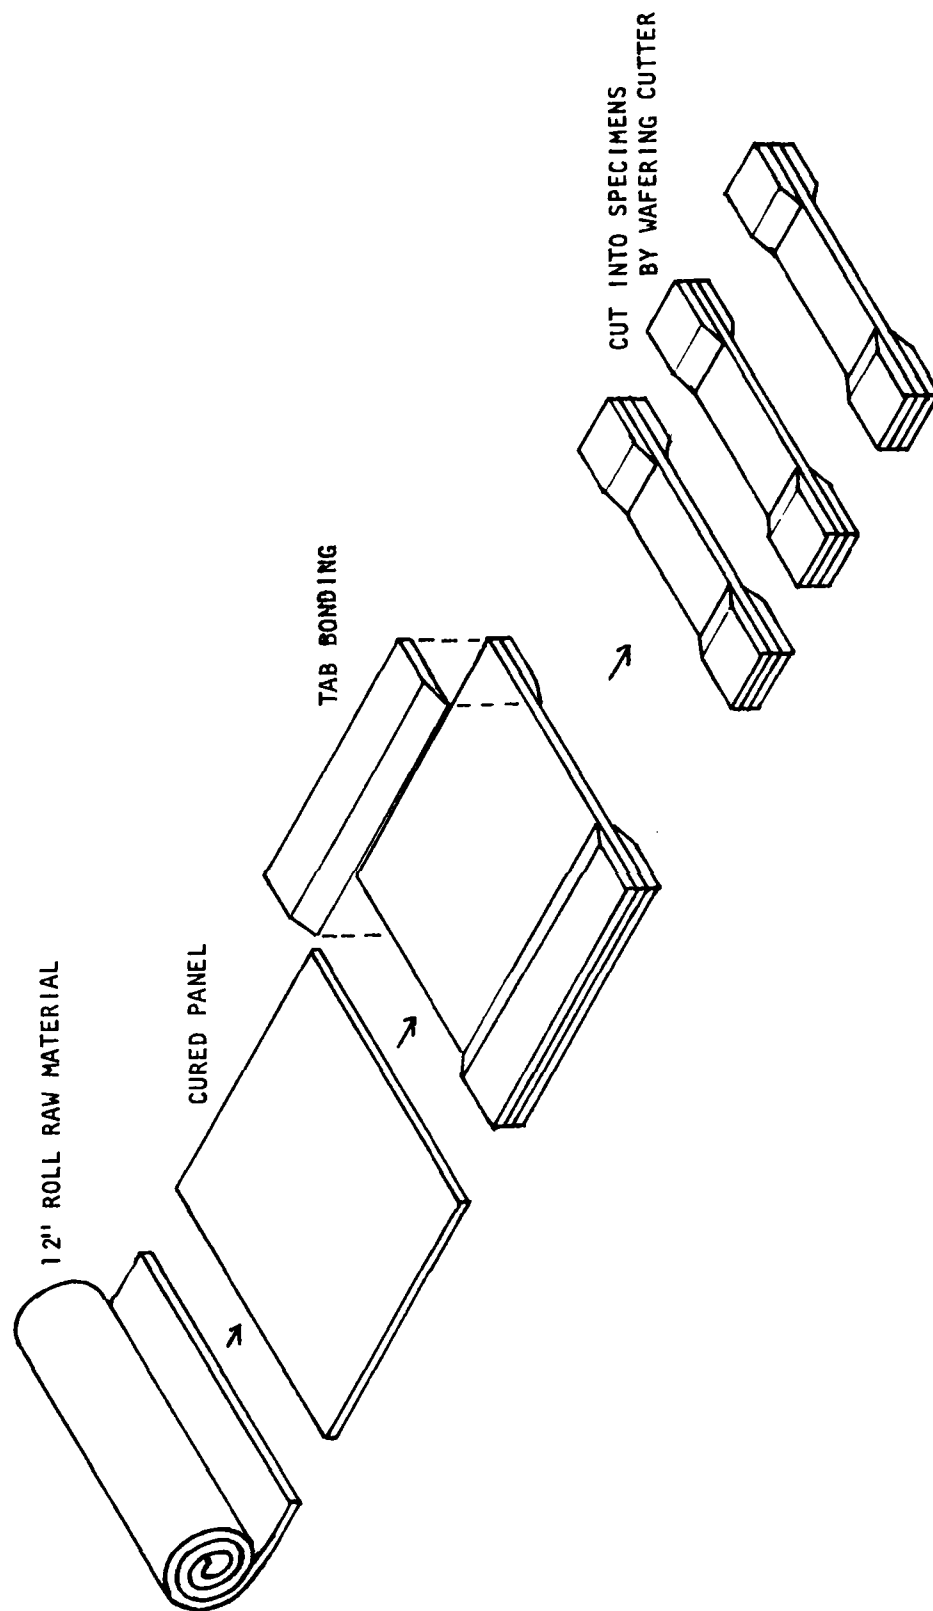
FATIGUE SPECIMEN FABRICATION PROCEDURE.
